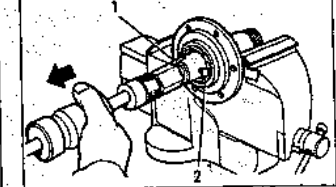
Using a slide hammer to remove the bearing and seal from the stub axle (Sec. 13)
